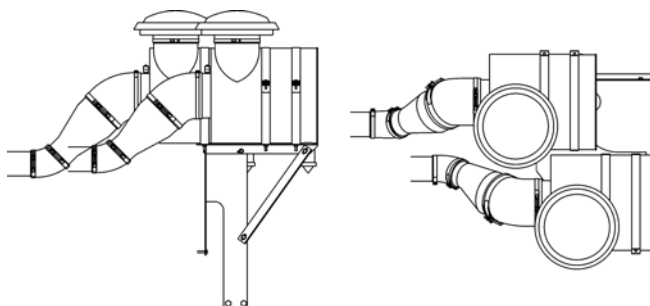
HEAVY DUTY AIR CLEANER ASSEMBLY
